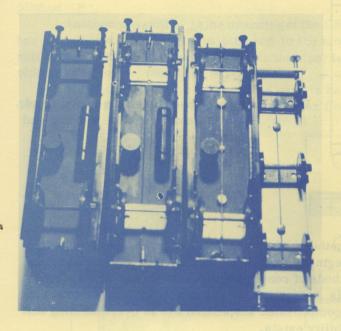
(top) Jig for assembly of CSUs on torsion bar wire.
